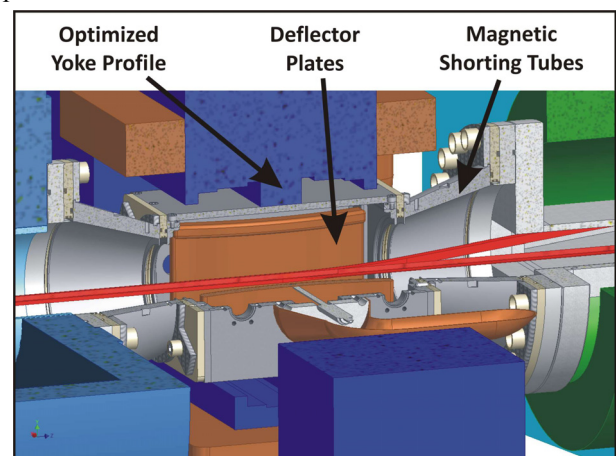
Sectional view of the chopper's magnet yoke and vacuum chamber containing deflector plates.
